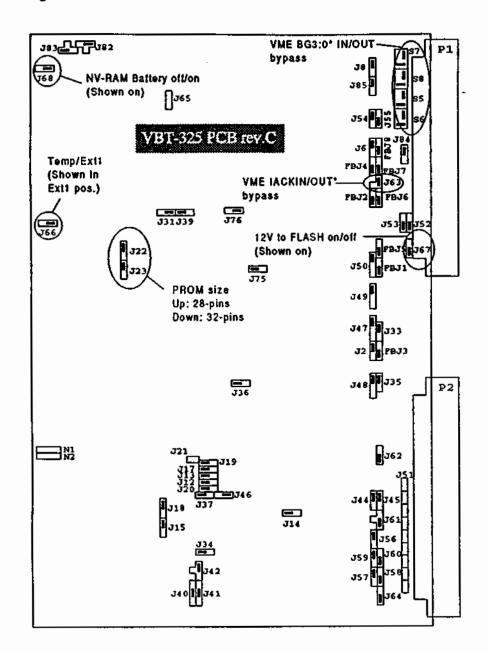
C. Miscellaneous jumper settings VBT-325 PCB rev C.
